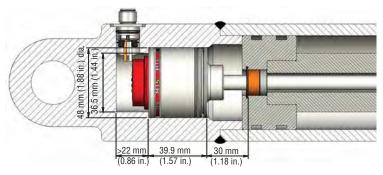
MH-Series Model MT rod-style sensor mechanical installation example
